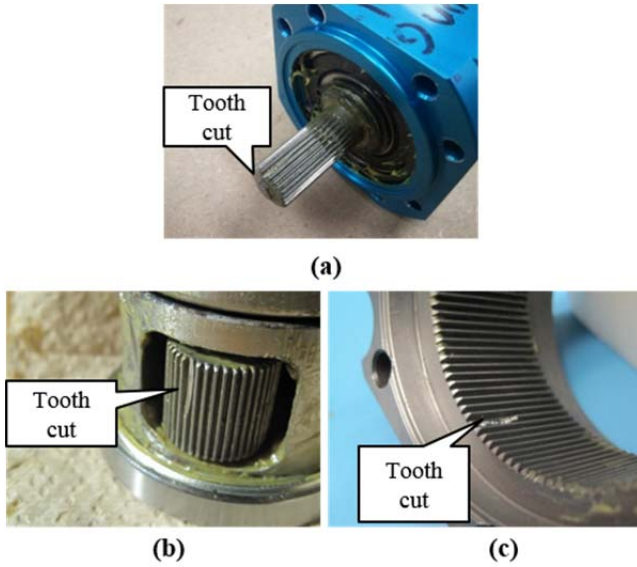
Seeded faults: (a) sun gear fault, (b) planet gear fault, (c) ring gear fault.
